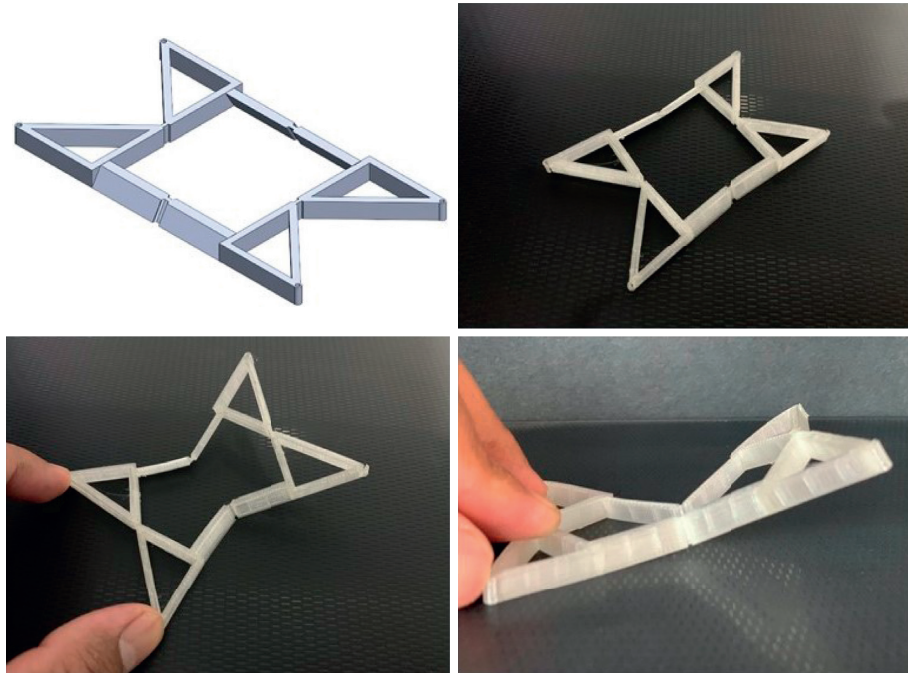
CAD design and mechanism 3D printed in TPU.
